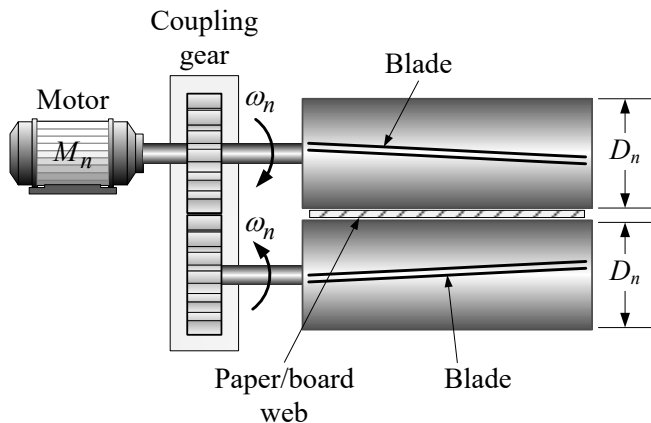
Disposition of the mechanical components of the cross-cutter flying shears with variable drive speed
